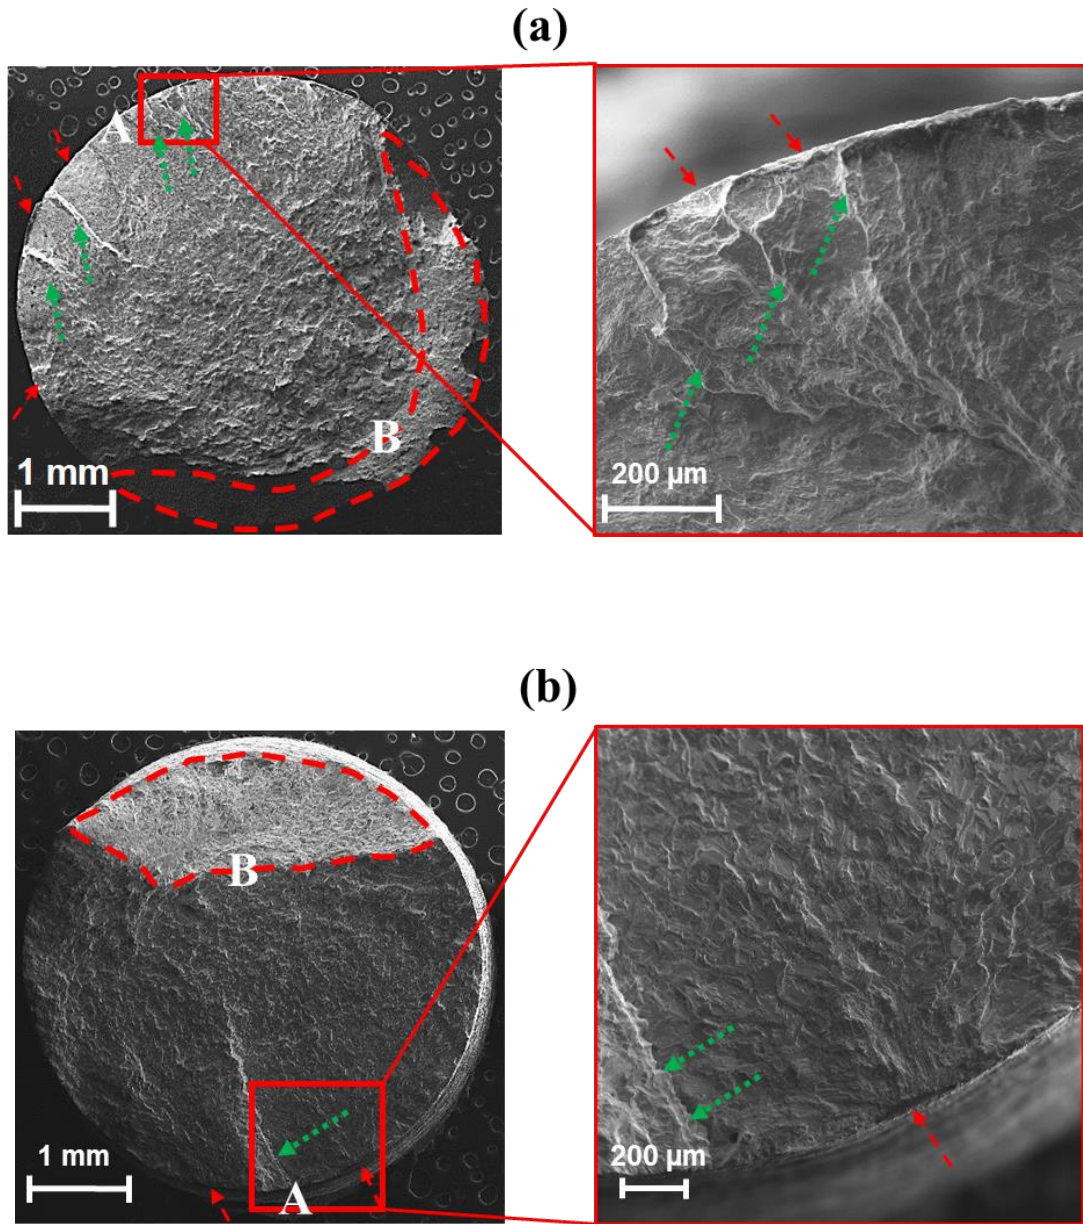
Fracture surface of L-PBF 17-4 PH SS specimens at 0.002 mm/mm strain amplitude showing crack growth and final fracture areas as well as the coalescence of cracks from different layers shown in zoomed-in images: (a) CA-H1025 (Sp_50, $2N_f = 113,374$ reversals), and (b) H1025 (Sp_13, $2N_f = 64,446$ reversals) heat treatment.
